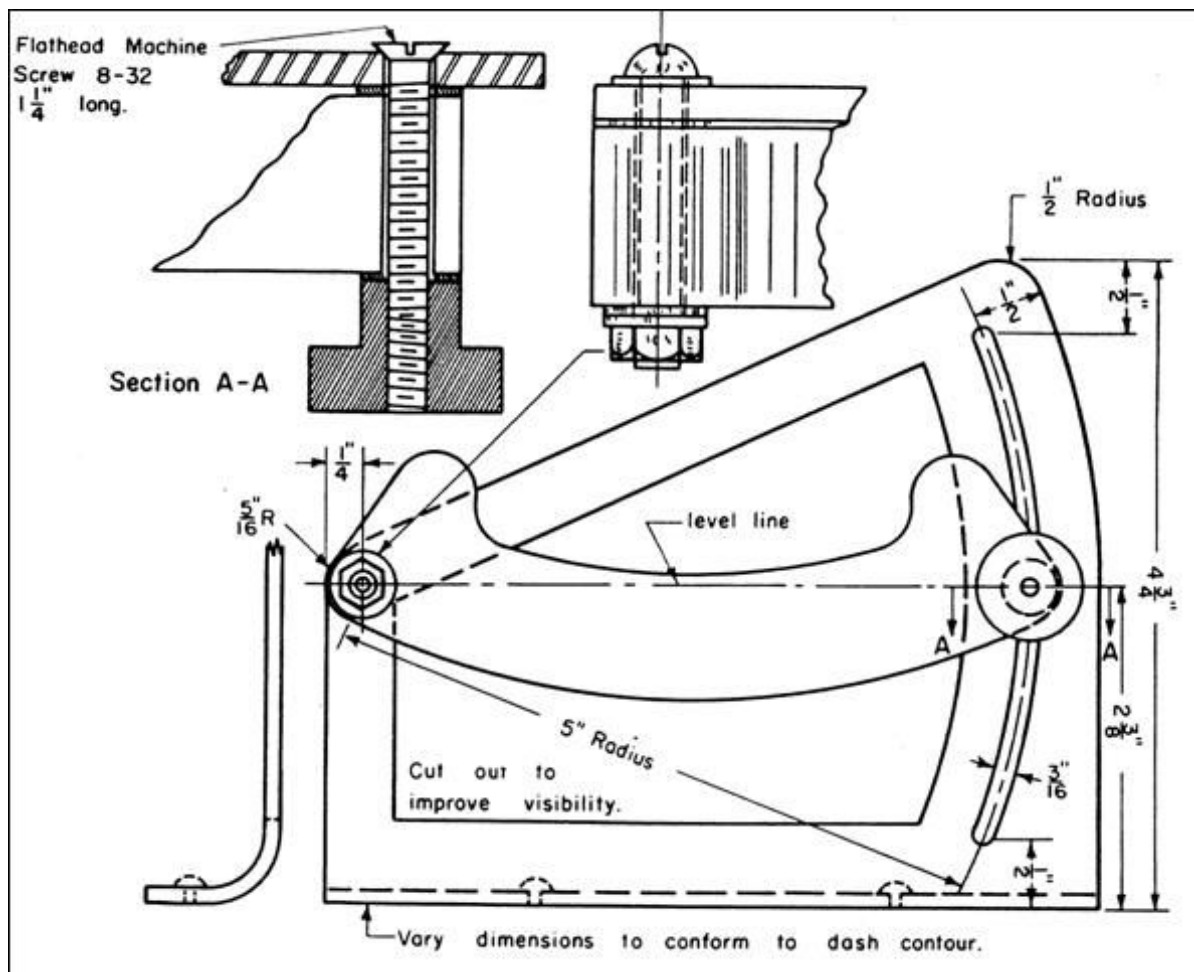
Suggested mounting for ball-bank indicator on dash.
